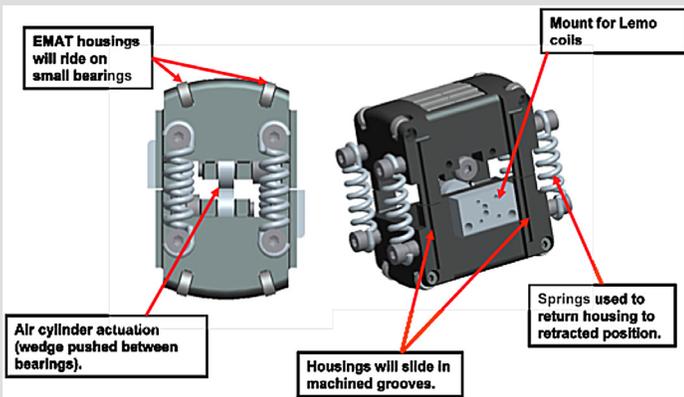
Fixtures are designed to mount EMATs inside a housing that will be towed through a well casing for corrosion monitoring.
